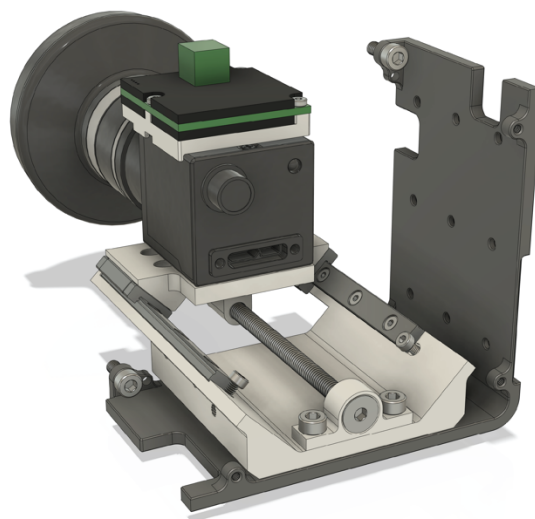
Imaging subsystem assembly. A FLIR BlackFly S Machine Vision Camera and Fujinon FE185C057HA-1 is shown. The camera is attached to a slider system whose position can be adjusted with the long grey screw at the back.
